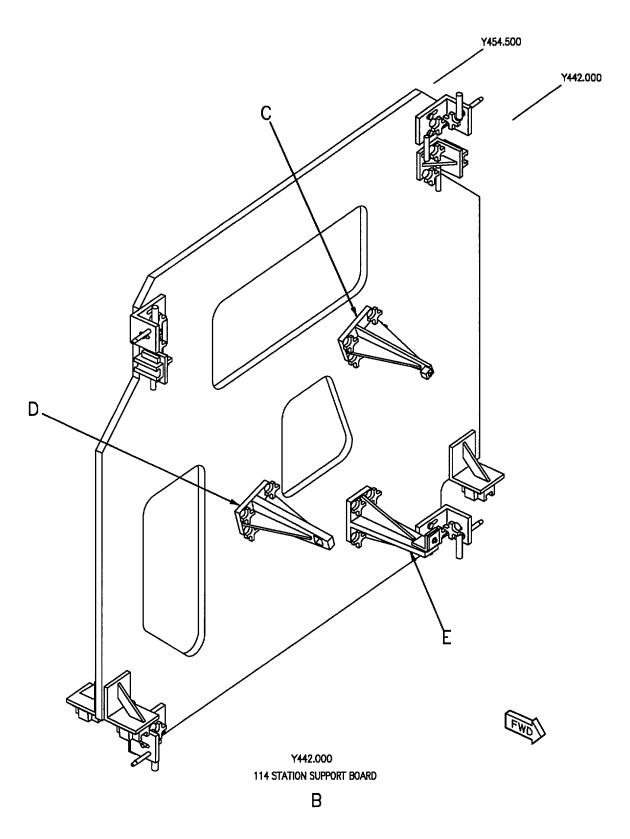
Installing Inlet in Maintenance Fixture (Sheet 3)
